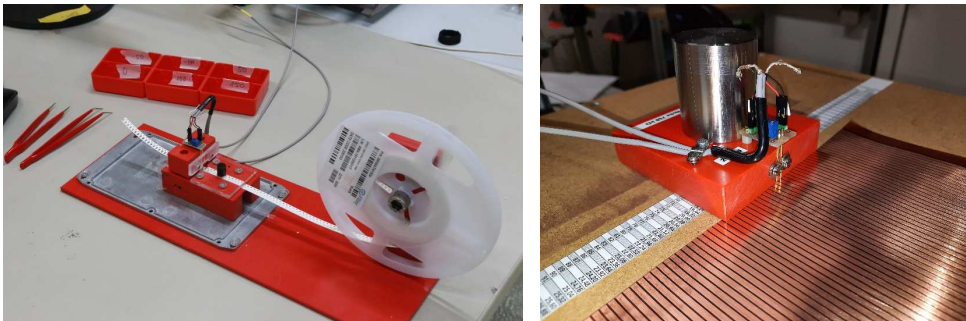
a) Resistor sorting fixture. b) Foil measurement fixture.
